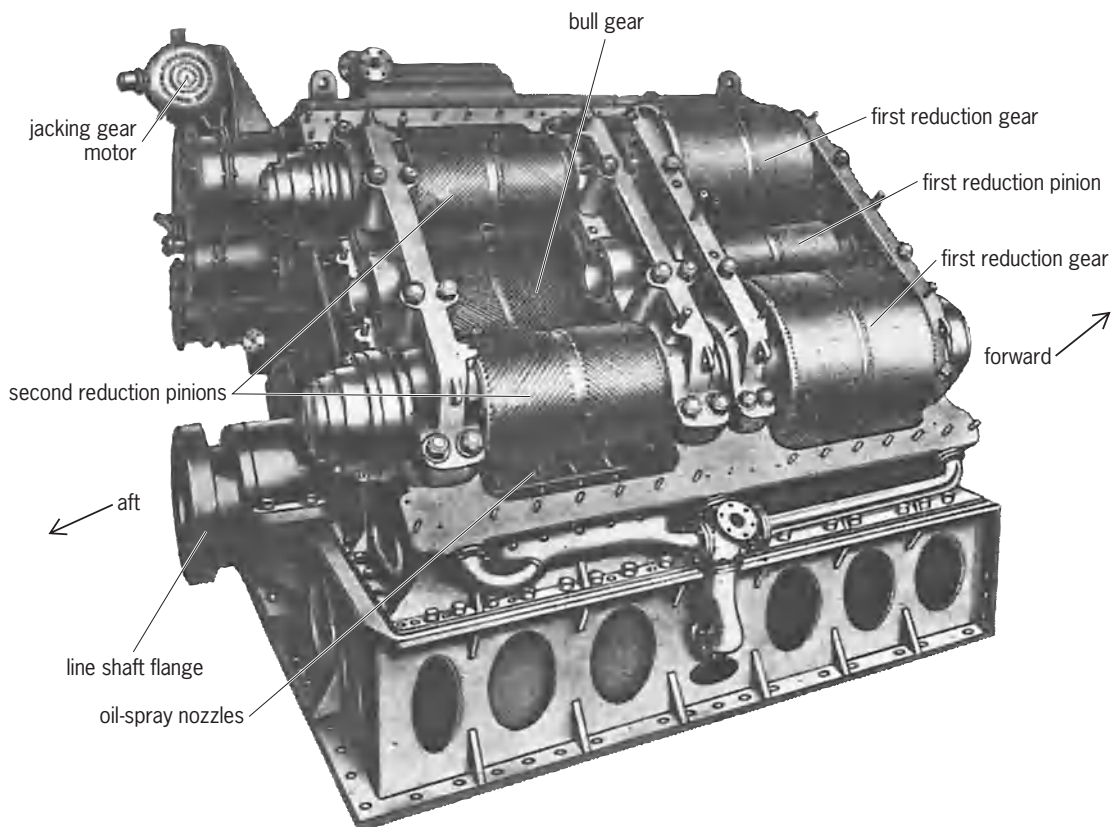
Locked-train, double-reduction gearing for use with a cross-compound steam turbine or twin gas turbines. (Naval Machinery, U.S. Naval Academy, 1946)
